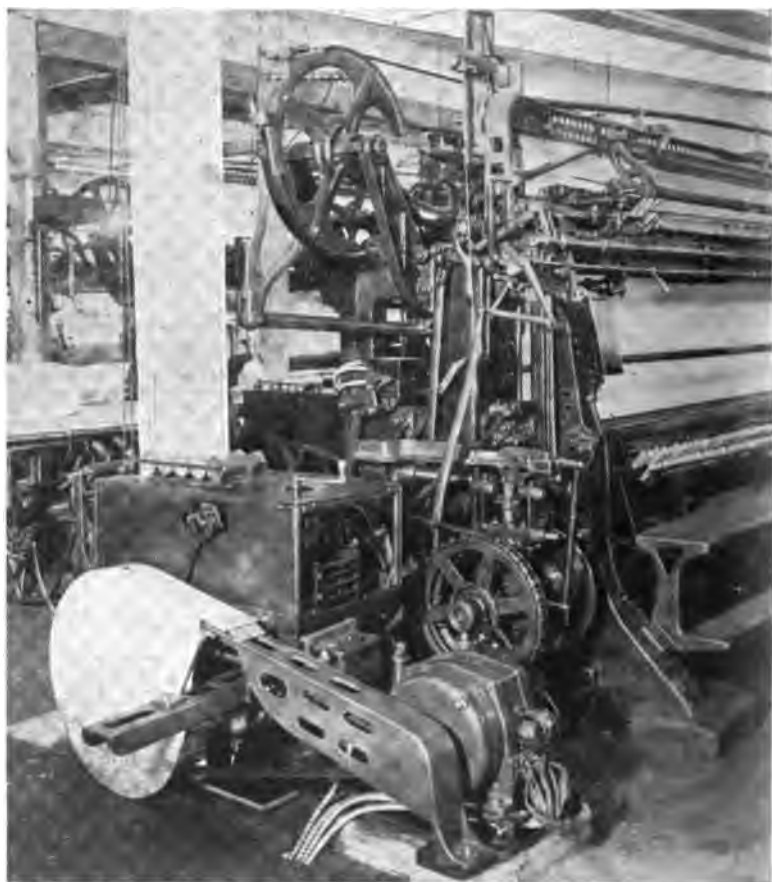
SEC. 10rr.—Embroidery machine with automatic control and G. E. motor.
